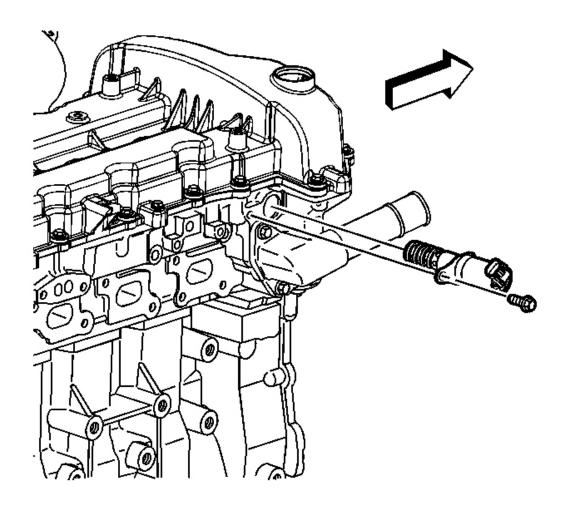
Identifying Camshaft Position Actuator Valve & Bolt Courtesy of GENERAL MOTORS CORP.
